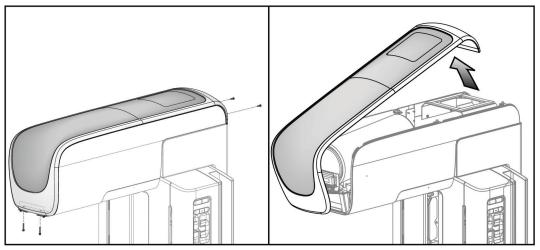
Top X-ray Tube Arm (Tubehead) Cover Removal
